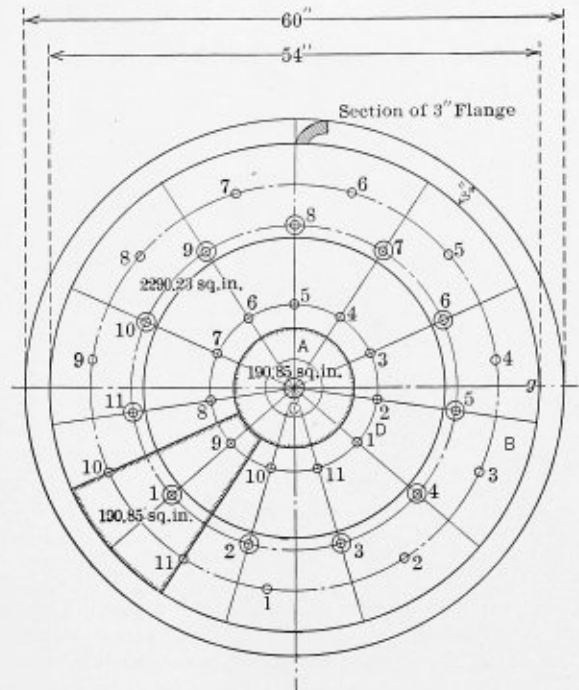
Method of Locating 34 Stays in 60-Inch Head
